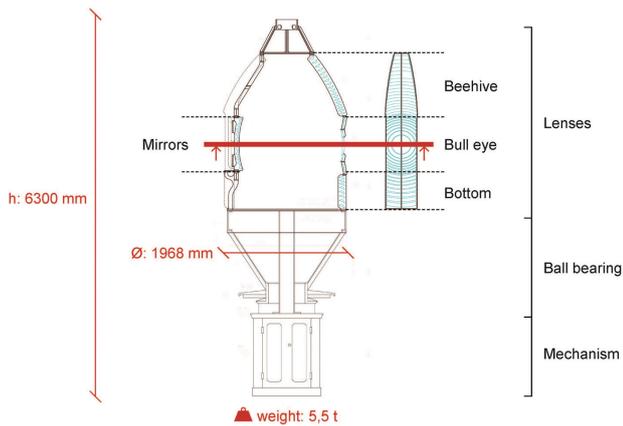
Technical drawing of the Tod Head lighthouse lantern
